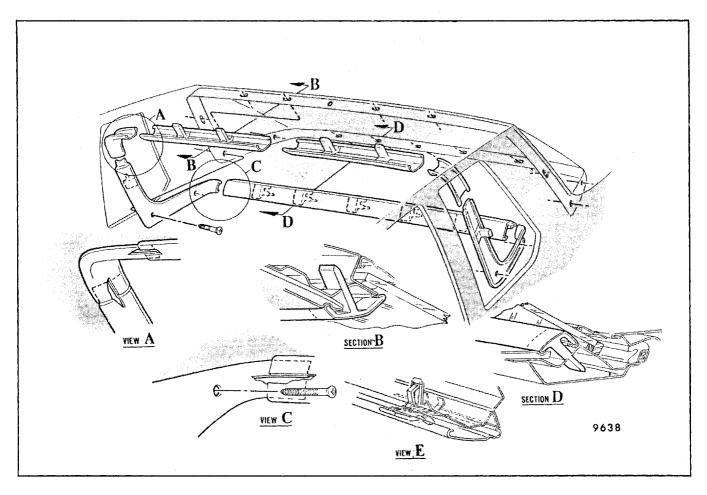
Back Window Garnish Moldings - B,C Styles (A Styles Similar)
